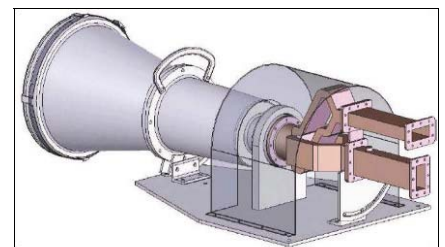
Cutaway view of the OMT/feedhorn assembly.
